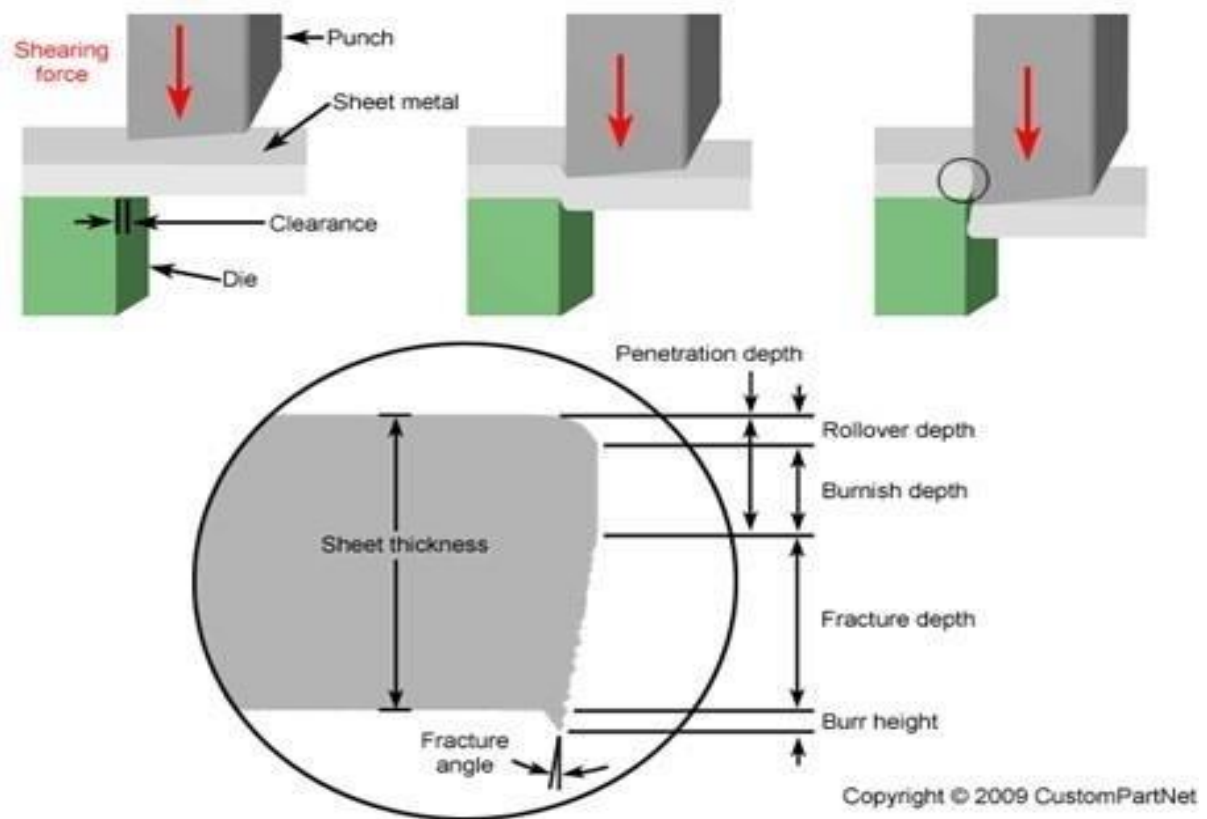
Working procedure of the Pneumatic Sheet metal cutting machine
